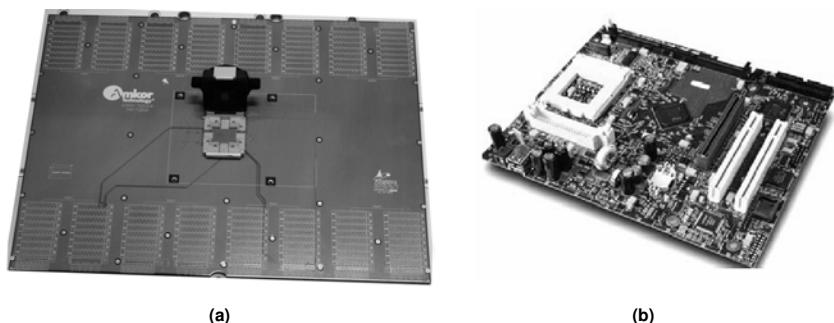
Comparison of a (a) high-speed digital test fixture PCB design compared with (b) "traditional" PCB design.
